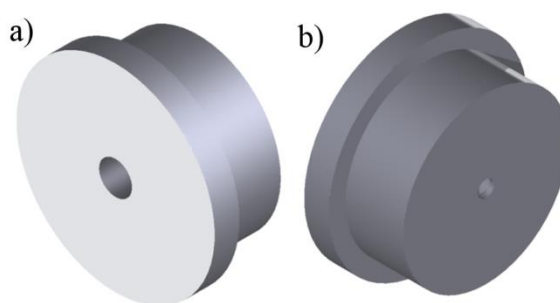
CAD drawings of a) the front face and b) the rear face of the anode plug.
